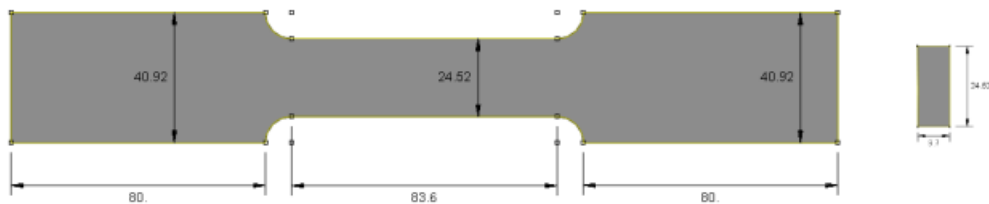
Dimensions of S355 material tensile test specimen (DISSIPABLE, 2021).
